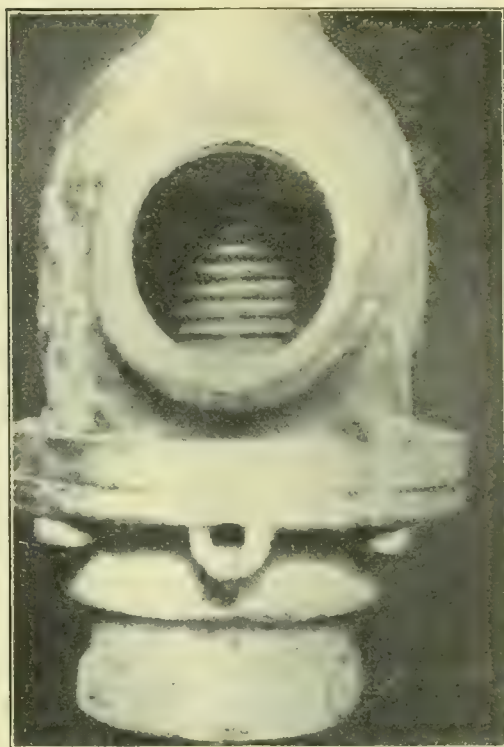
VIEW OF SPRING SAFETY VALVE, SHOWING SPRING COILS CLOSED AND INCAPABLE OF FURTHER COMPRESSION.
